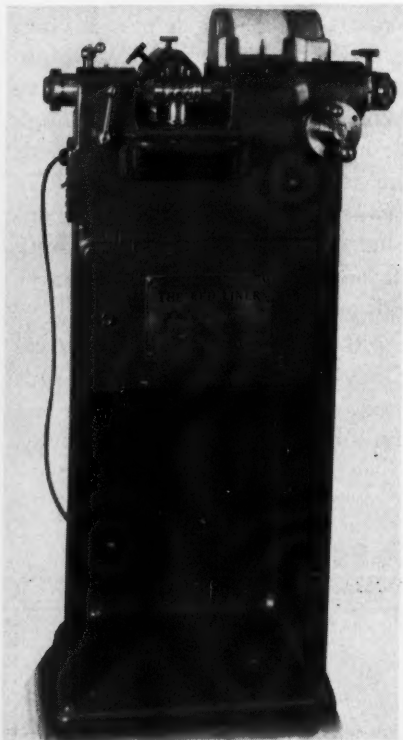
shows a front view of this machine, whereas Fig. 2 shows a close view of the hourglass worm being checked and the master roller employed. The sector or master roller carrier is centralized with the worm by means of a ball point plunger, held in the carrier and brought in contact with both sides of the worm thread. This sets the carrier in the correct position for both angle and center distance. A light bulb in the cabinet is provided for illumination to facilitate making this setting and to inspect the location of contact of worm and sector teeth or roller.
